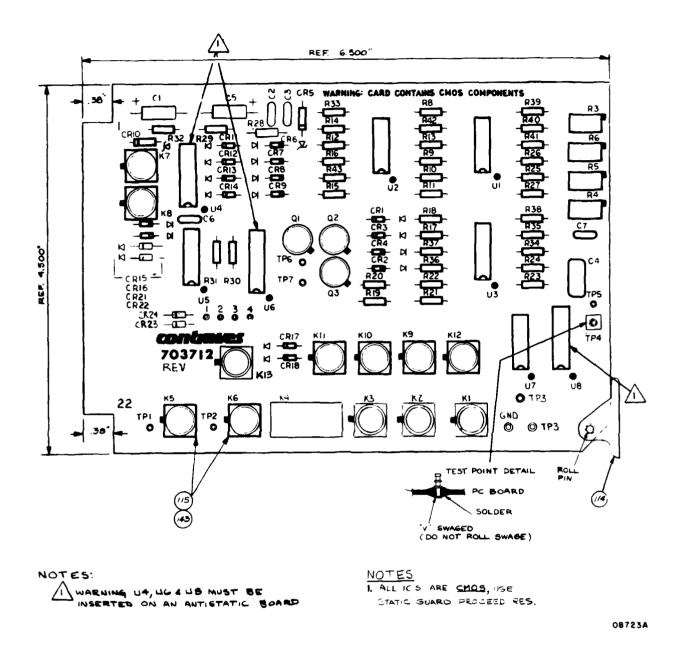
Searchlight Control Card II (A5) Assembly Drawing.
